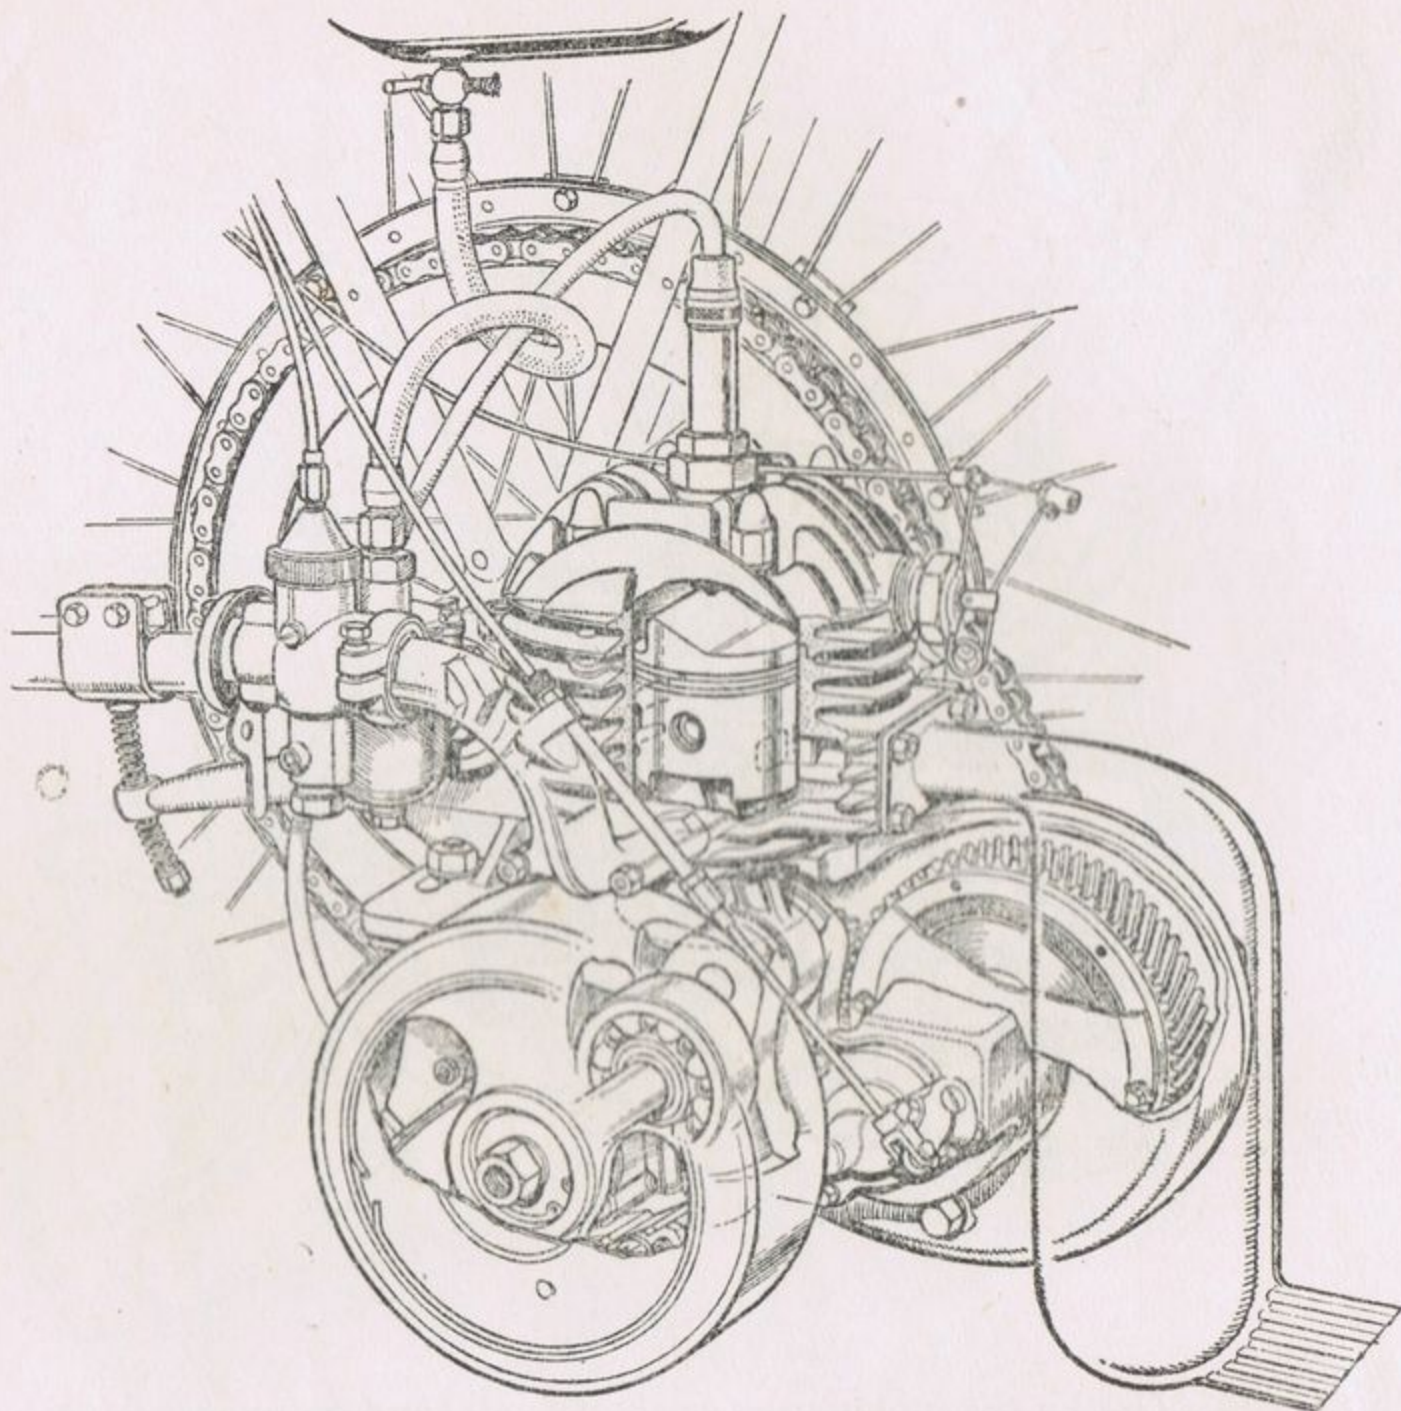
Of 32 c.c. engine capacity, the Cyclomaster is sold as a complete rear wheel. The engine is contained within an open-sided drum, which forms the wheel hub and is provided with louvres designed to assist cooling by directing air on to the engine. In unit with the engine is a single-plate, cork-insert clutch running in oil. Primary and final drives are by chain. A notable feature of the engine is that the inlet port is controlled, not by the piston, but by a crankshaft-driven rotary valve—illustrated on page 33
